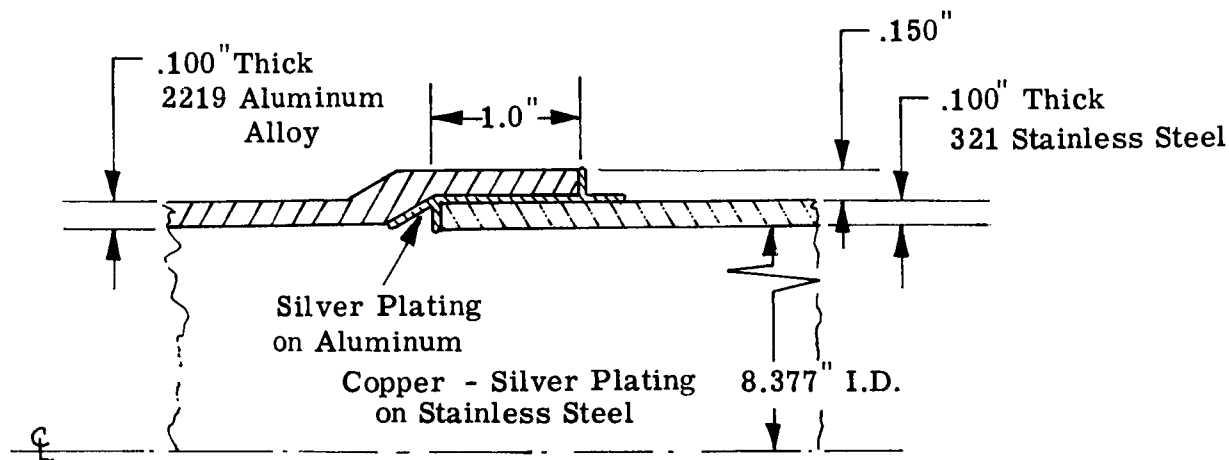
CORROSION SPECIMEN-SILVER PLATED 321 STEEL
